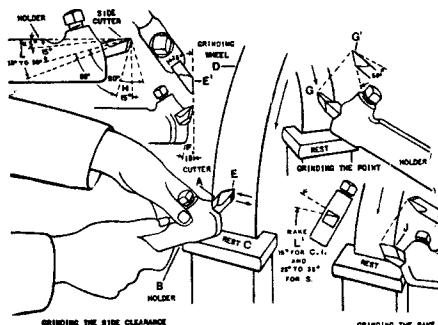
GRINDING A SIDE TOOL CUTTER IN HOLDER.
